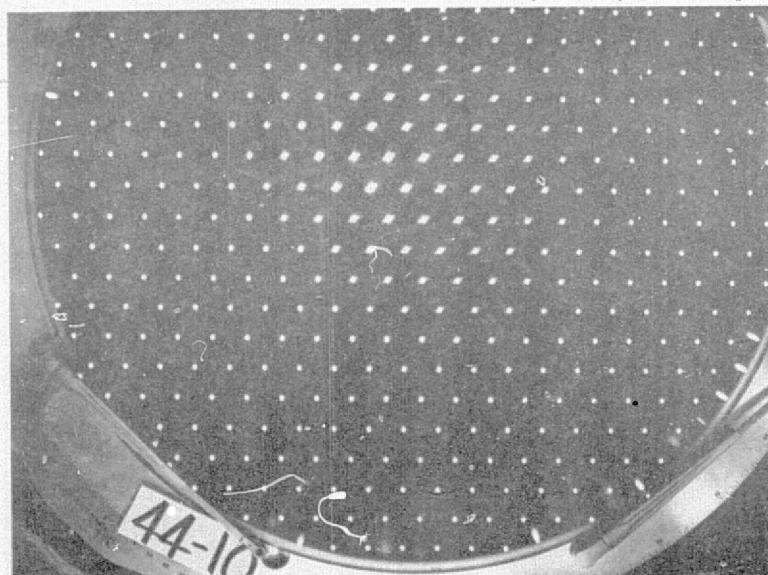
Hole Spacing .243 Inch (6.17mm) Hole Size .008 Inch (0.20mm)
